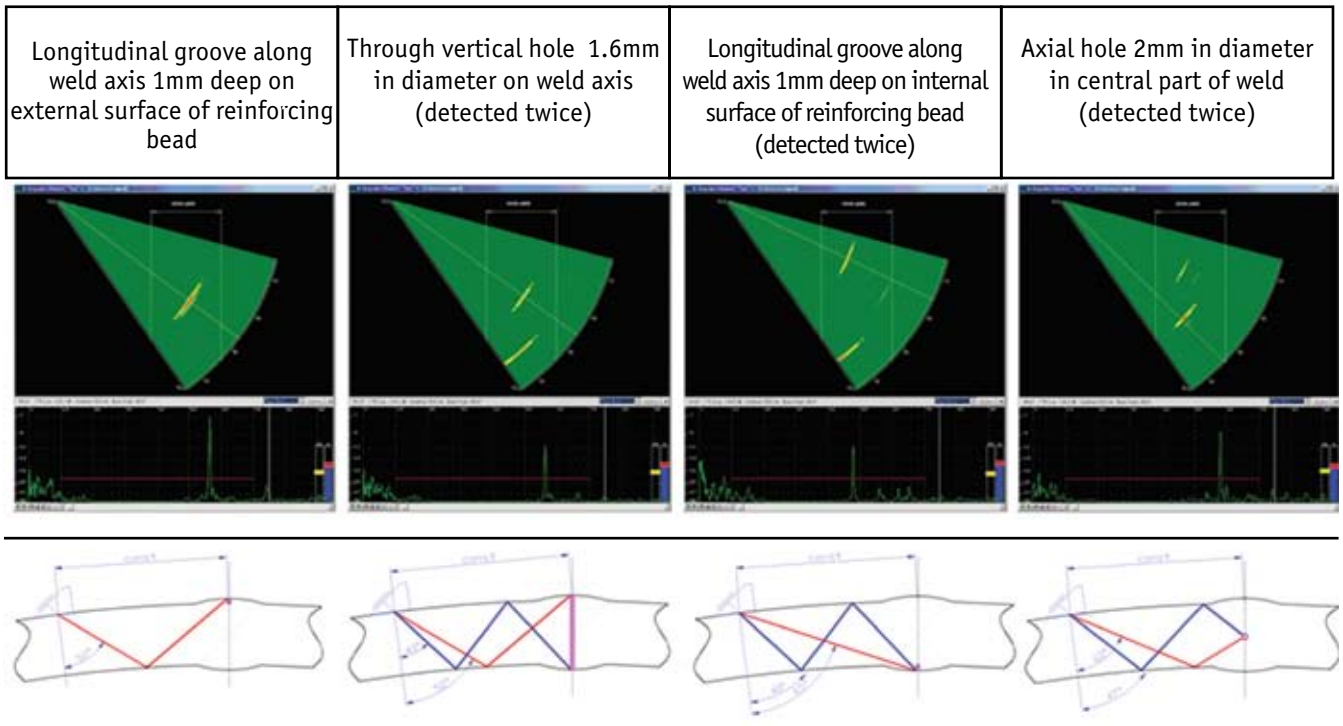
Example of detection of defects in a weld with the use of a PA.
